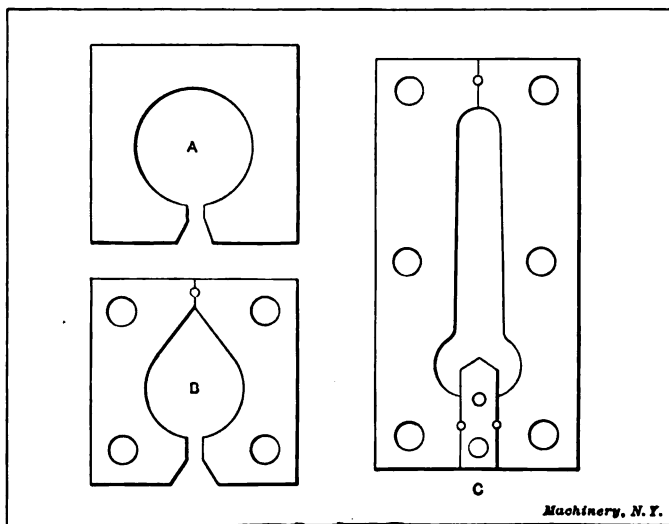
Trimming Dies: A, One-piece Hot-trimmer; B, Two-piece Hot-trimmer; and C, Three-piece Cold-trimmer
